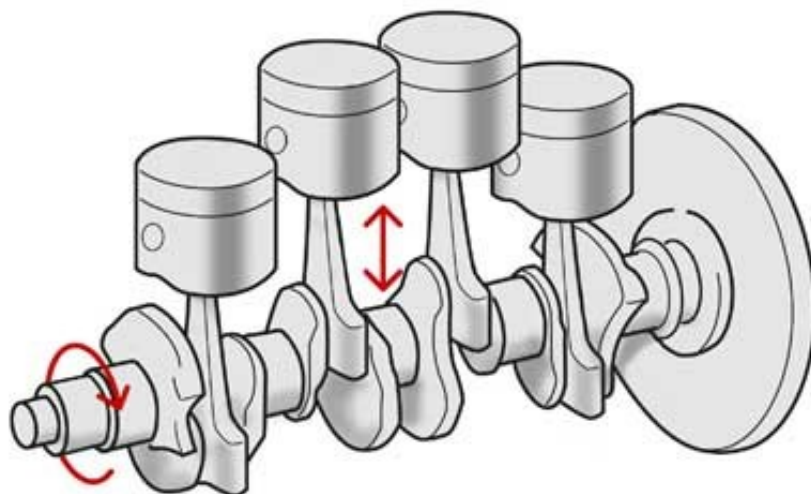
A rotating assembly of an internal combustion engine, the pistons and rods affect the crankshaft with forces in both directions [9]
